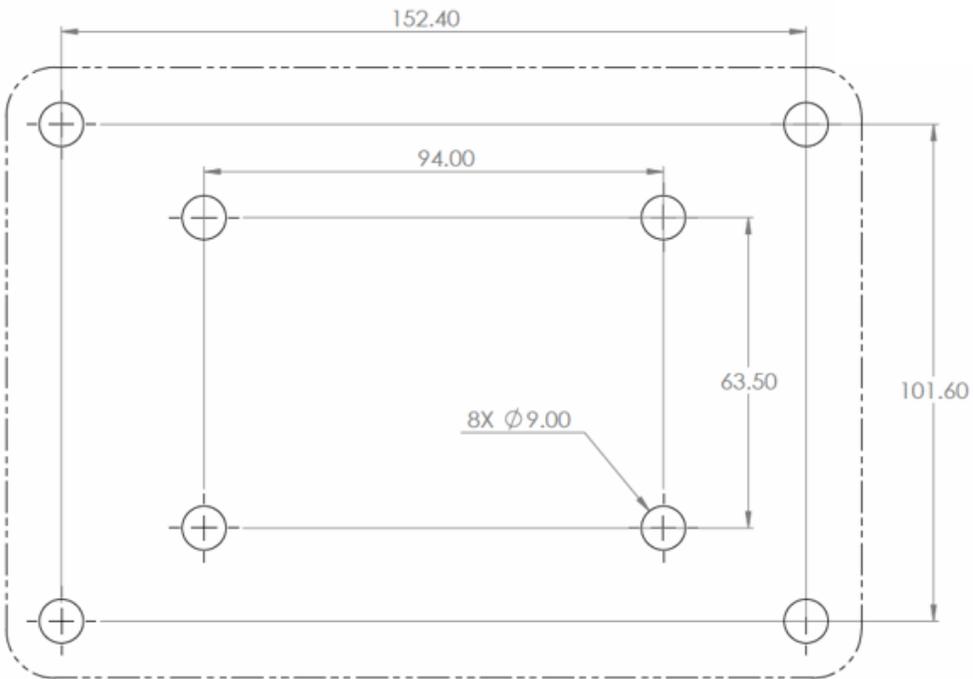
Flush-mounting holes on bottom of VR500
